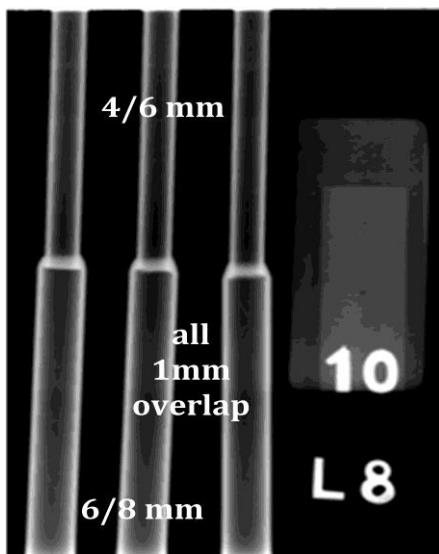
RT Images of 4/6mm # 6/8 mm welded samples
